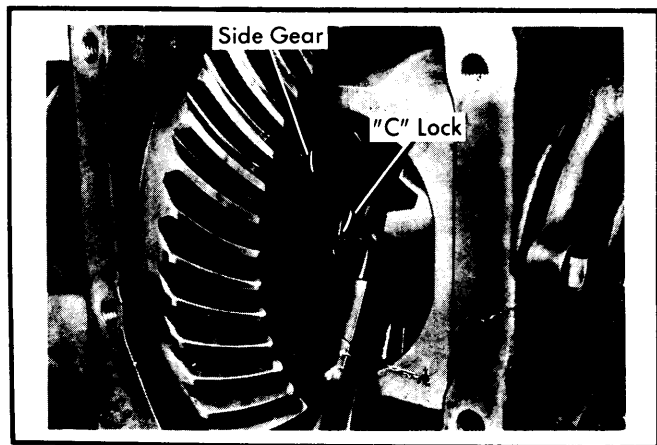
Removing "C" Lock for Axle Shaft Removal
